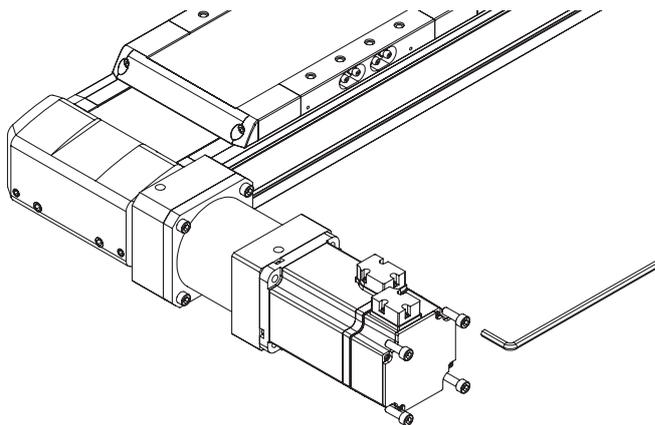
Bolting the motor to the linear table HT-B with gears
